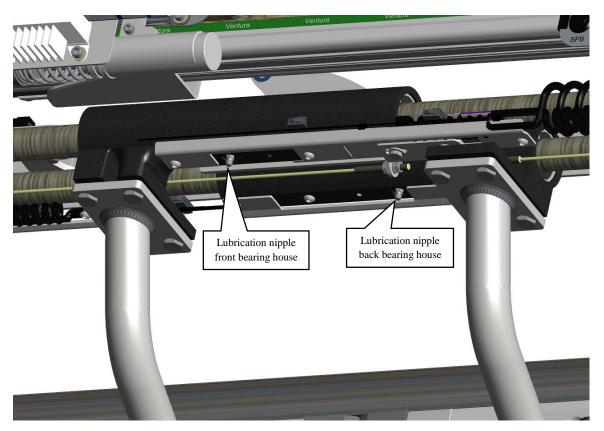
Apply multipurpose grease (Q8 Rembrandt EP2) to bearing housings
